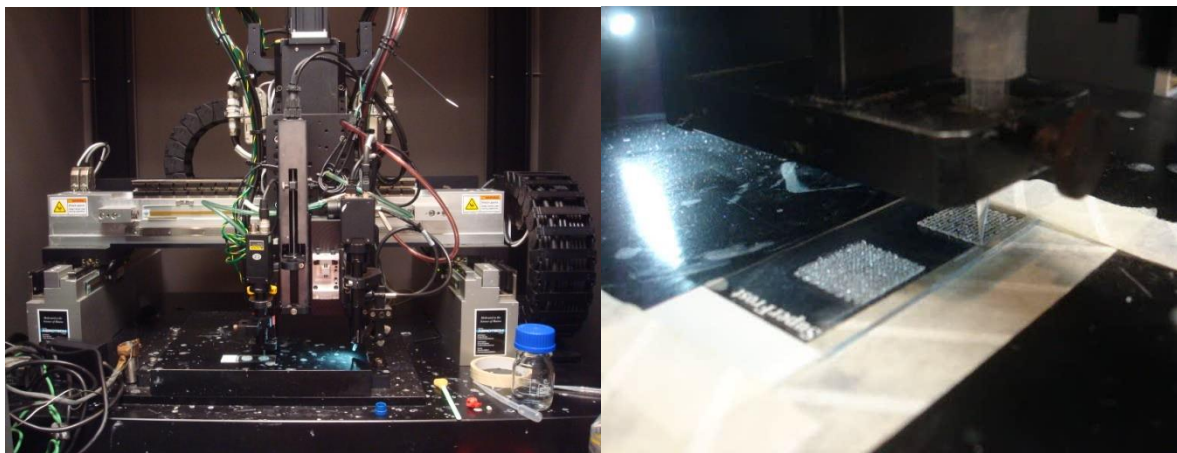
nScrypt 3Dn-300-TE rapid prototyping machine
